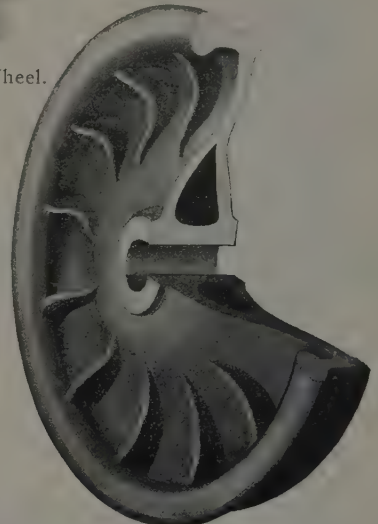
Double Plate Chilled Cast Iron Wheel. Lobdell Car Wheel Company.
